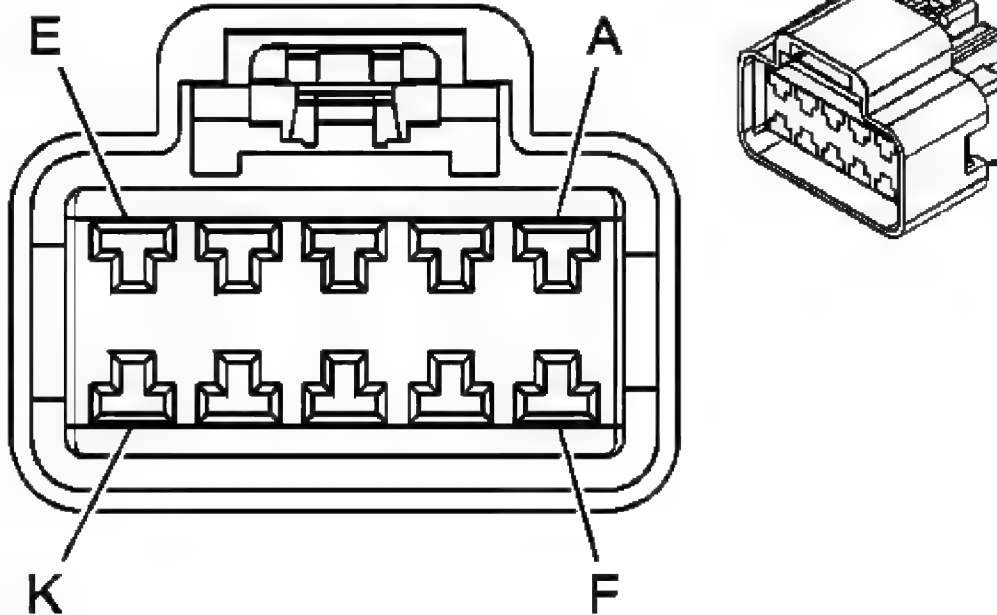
Passenger Seat Adjuster Switch (AH8) Connector End View
